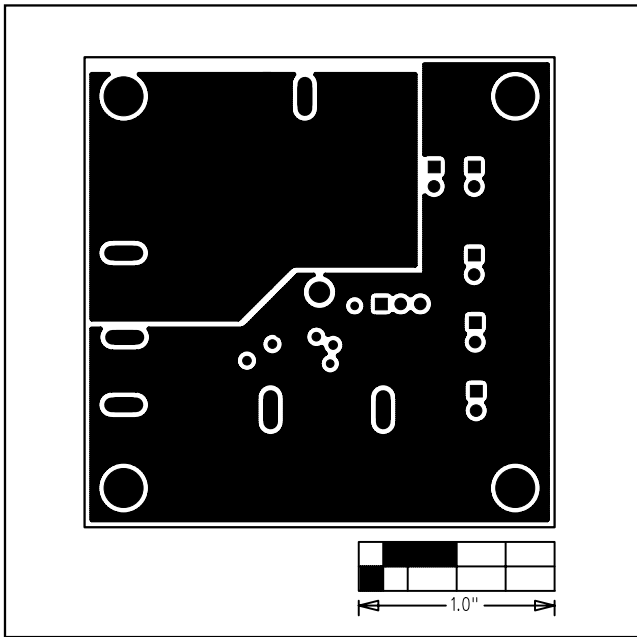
MAX1515 EV Kit PC Board Layout—Inner Layer 2 (GND, PGND)
